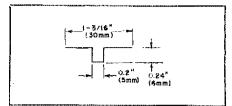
Dimensions for L6. The material is no. 24 copper wire. If possible it should be silver plated.
